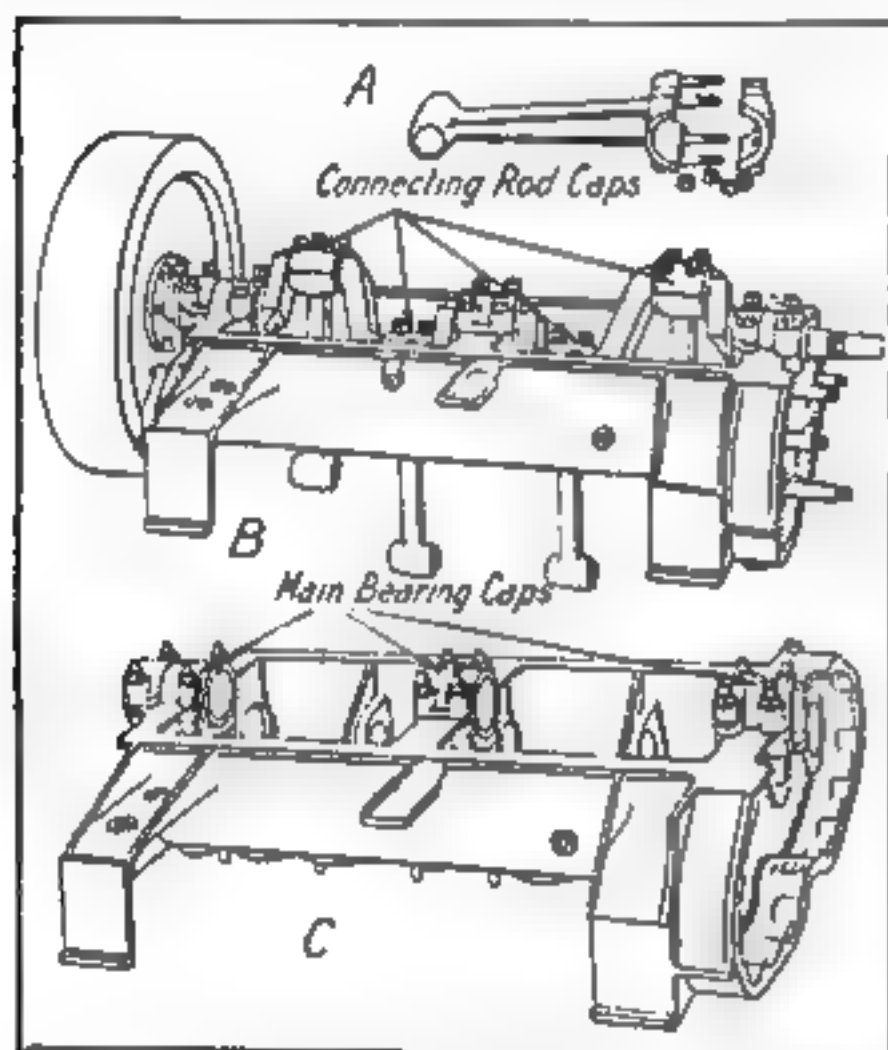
Showing method of supporting crankcase to provide ready access to connecting rod and crankshaft bearings
